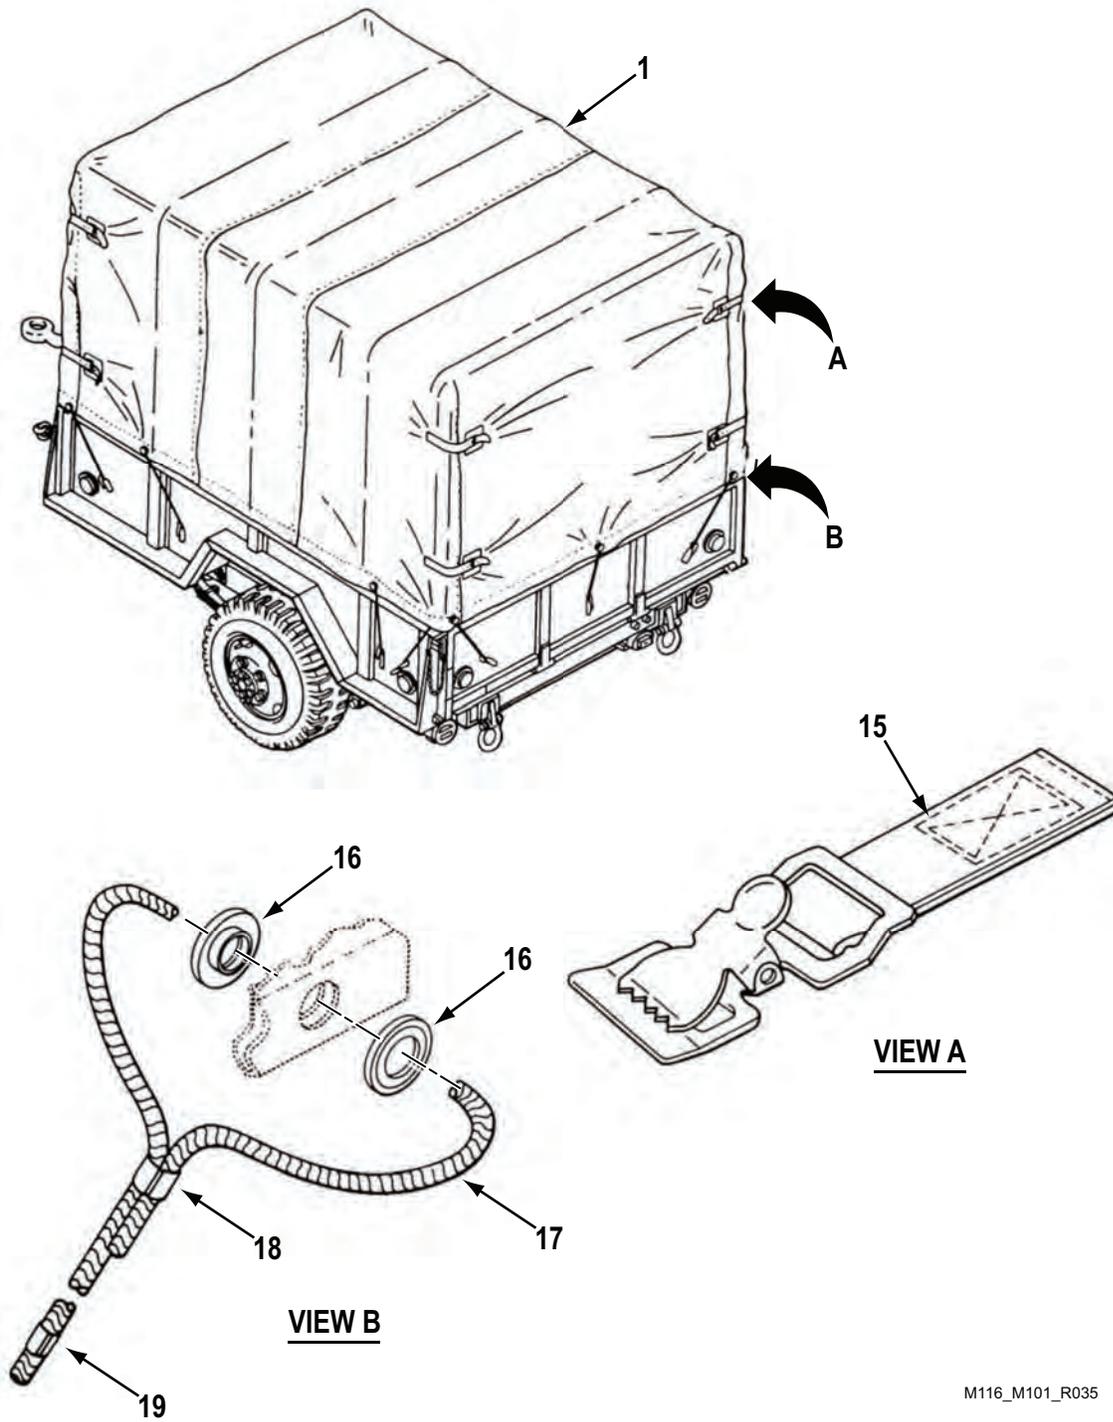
Canvas Cover Assembly and Bows. (Sheet 2 of 2)
